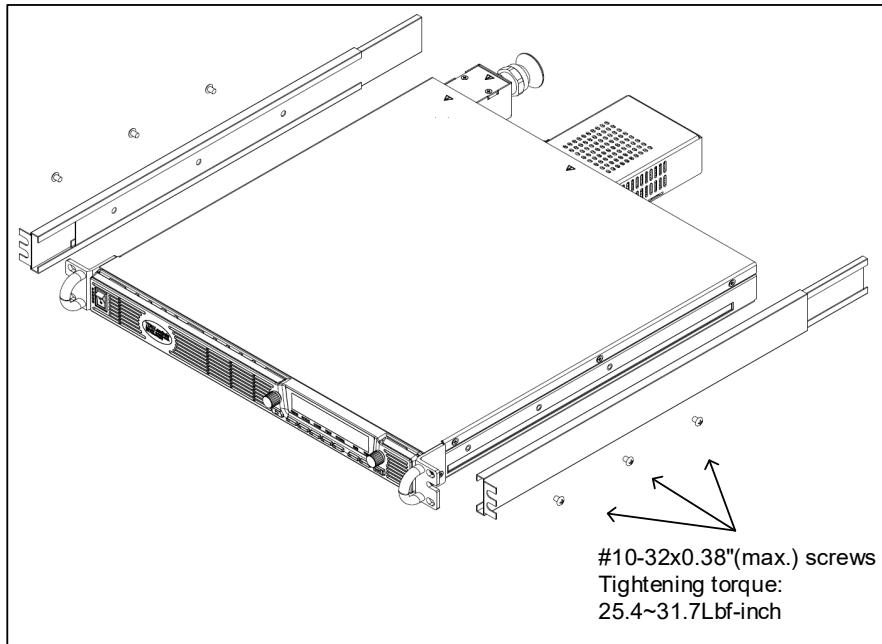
1.7 ÷ 5kW Rack – Mount Slides Assembly
